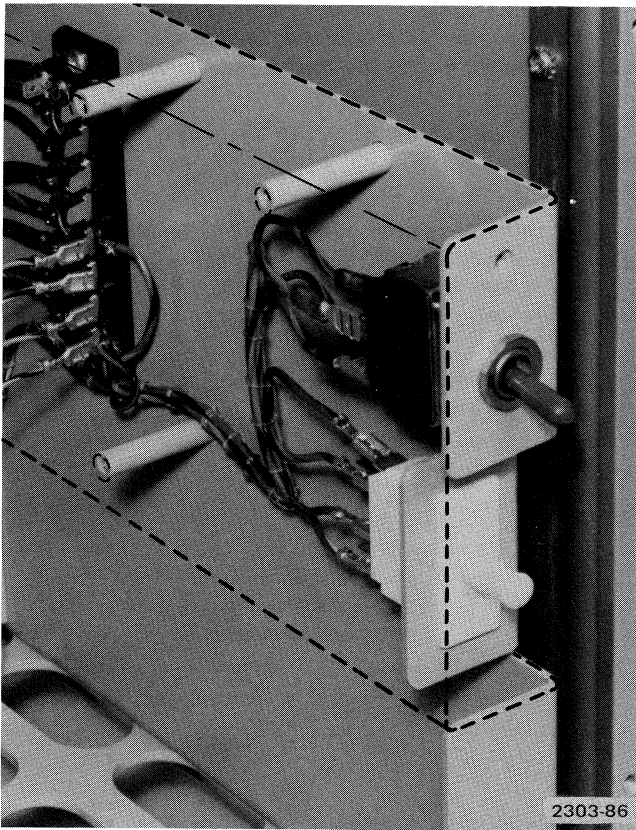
Transformer Terminals and Power Switch Assembly.
